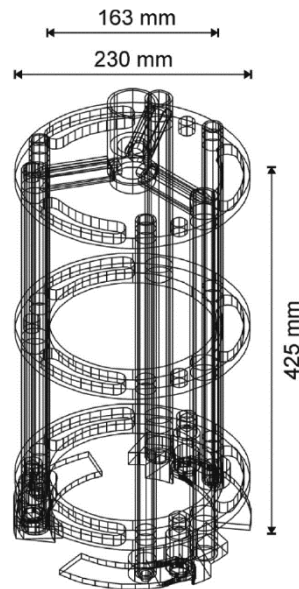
Technical drawing of the mini-block sampler (Emdal et al., 2016)
